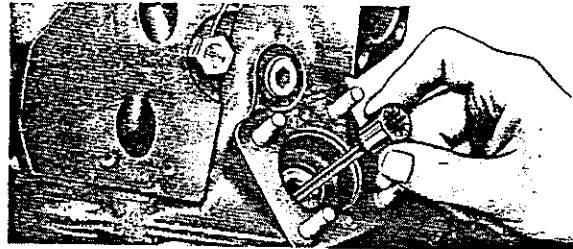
Installing Overspeed Governor Drive Shaft into Inlet Housing
